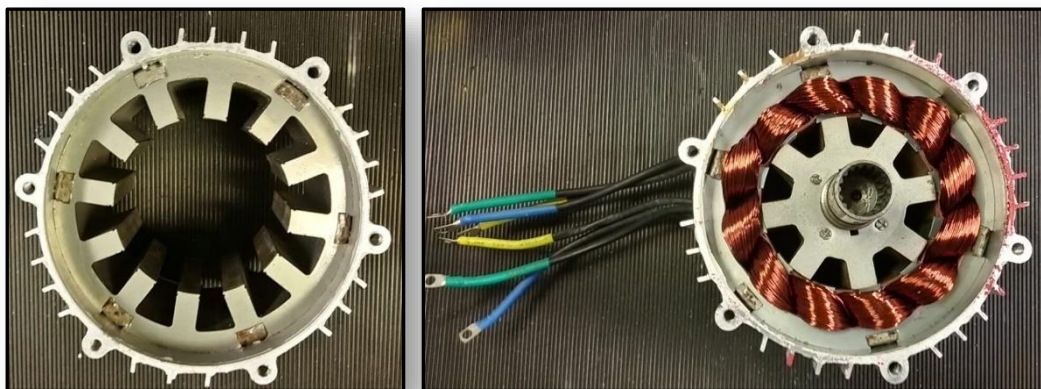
A 12-8 SRM with only the stator and outer casing (left) and a fully assembled motor (right).
